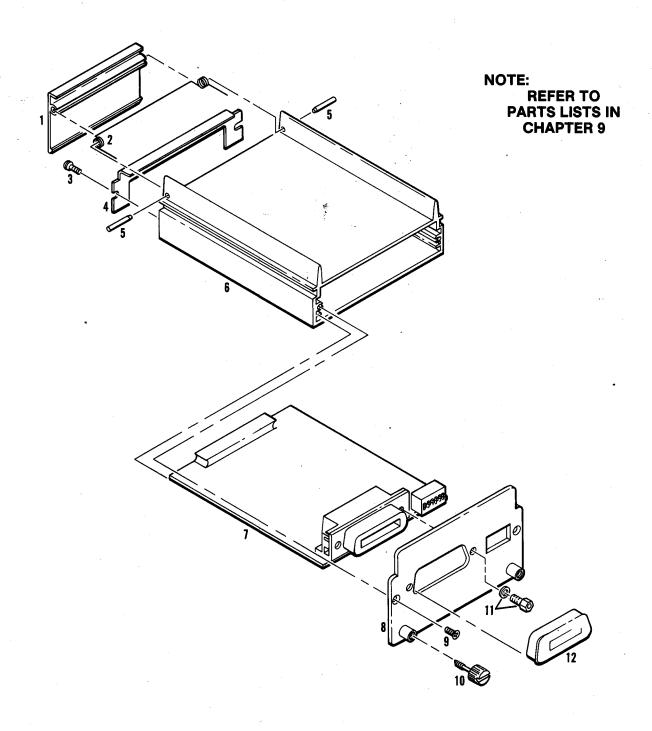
Optional I/O Module, Illustrated Parts Breakout
